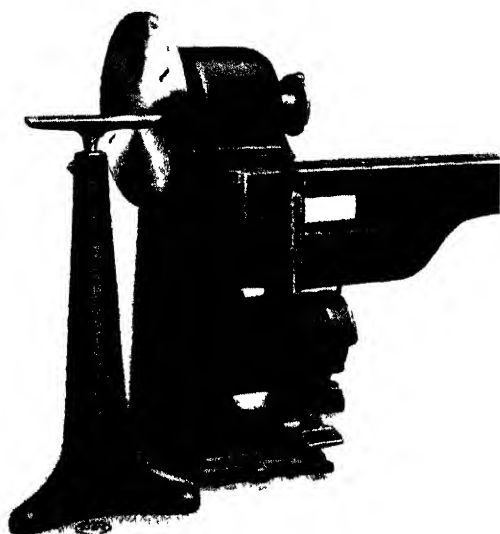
Outside turning plate and tool rest of a popular wood turning lathe.
